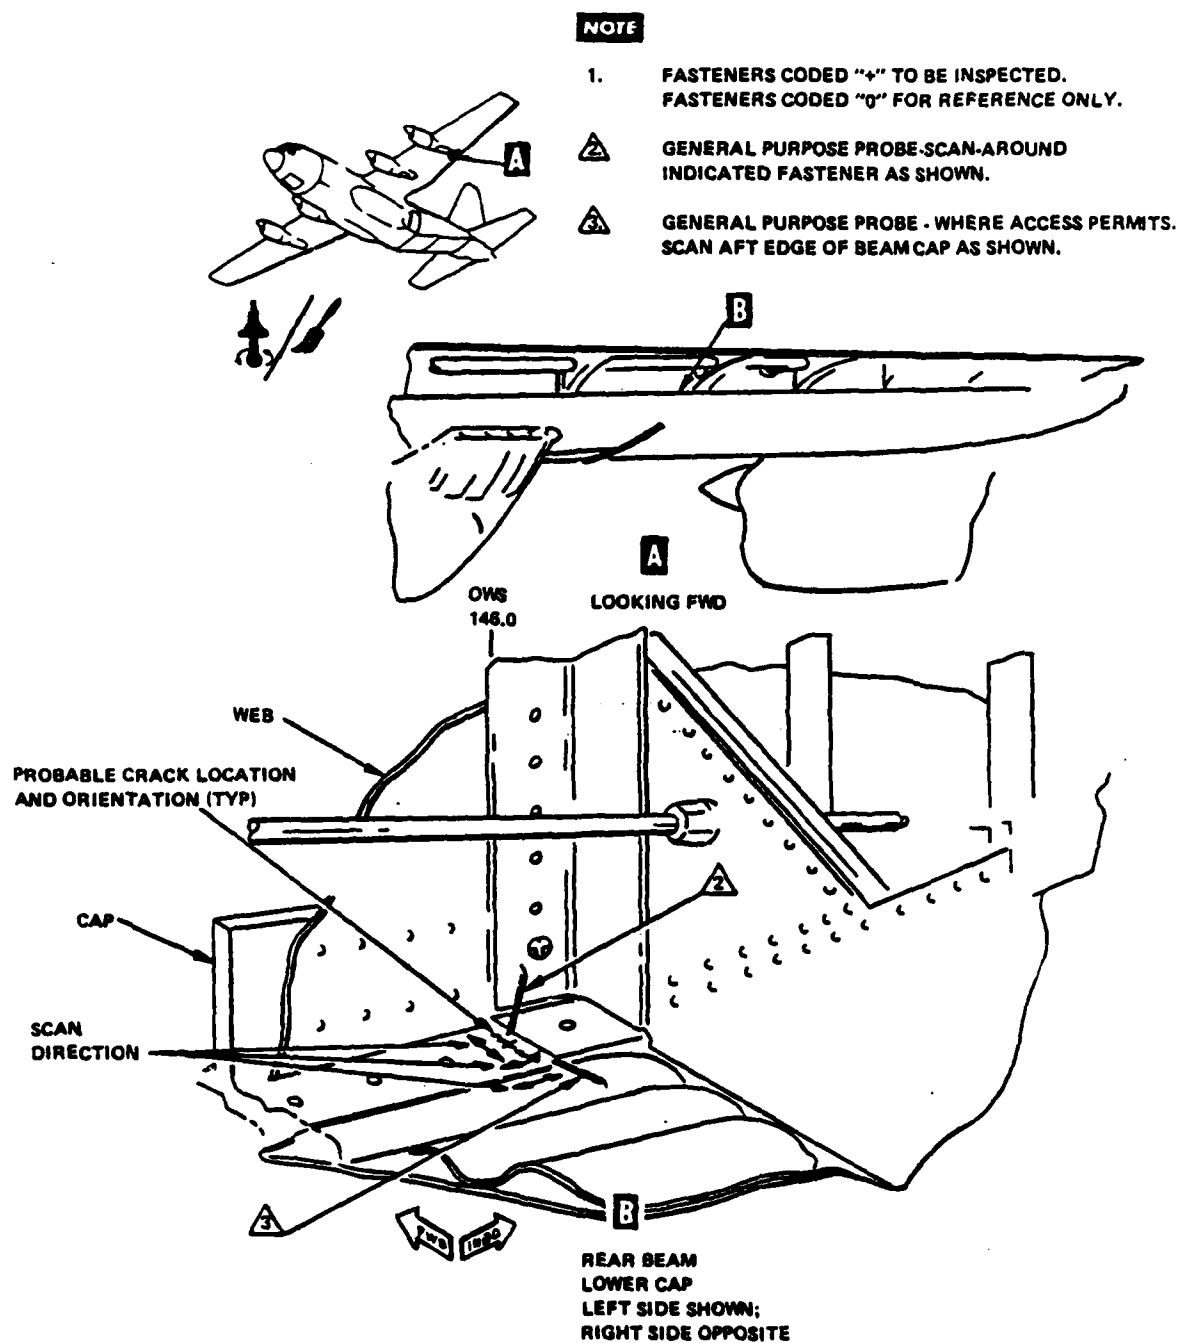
Inspection of Rear Beam Lower Cap at Aft Flange Thickness Change, OWS 146
